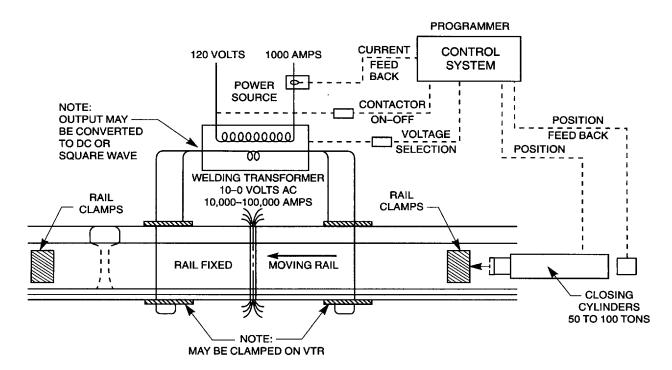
Automatic Hydraulically Operated Flash Welding Maching with Horizontal Clamping
